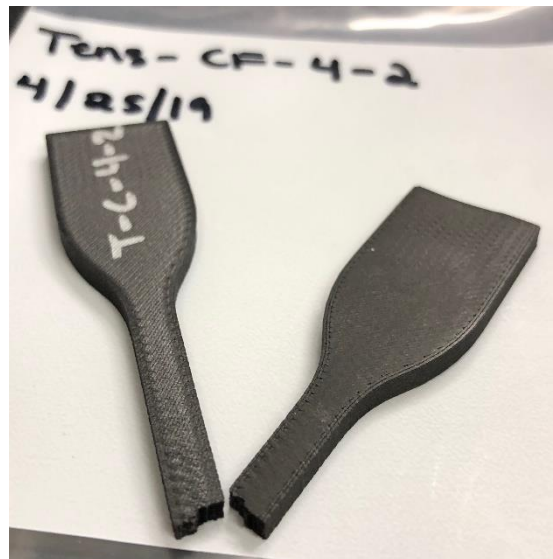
CF4 - A CF4 tensile specimen after testing.
